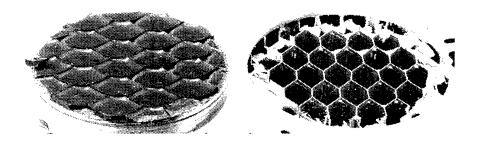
Failure surfaces resulting from tensile testing of the Dura-Core honeycomb and JD Lincoln adhesive conditioned 150 days at 70°C/100%R.H., indicating fillet bond pull-out.
